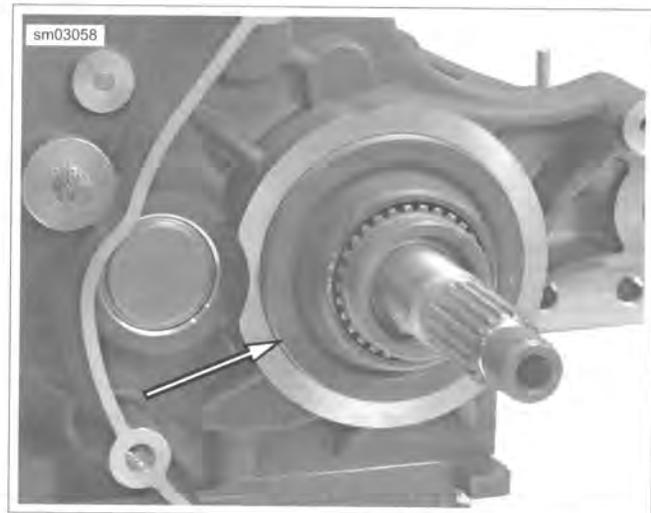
Place Main Drive Gear Seal Over Pilot
